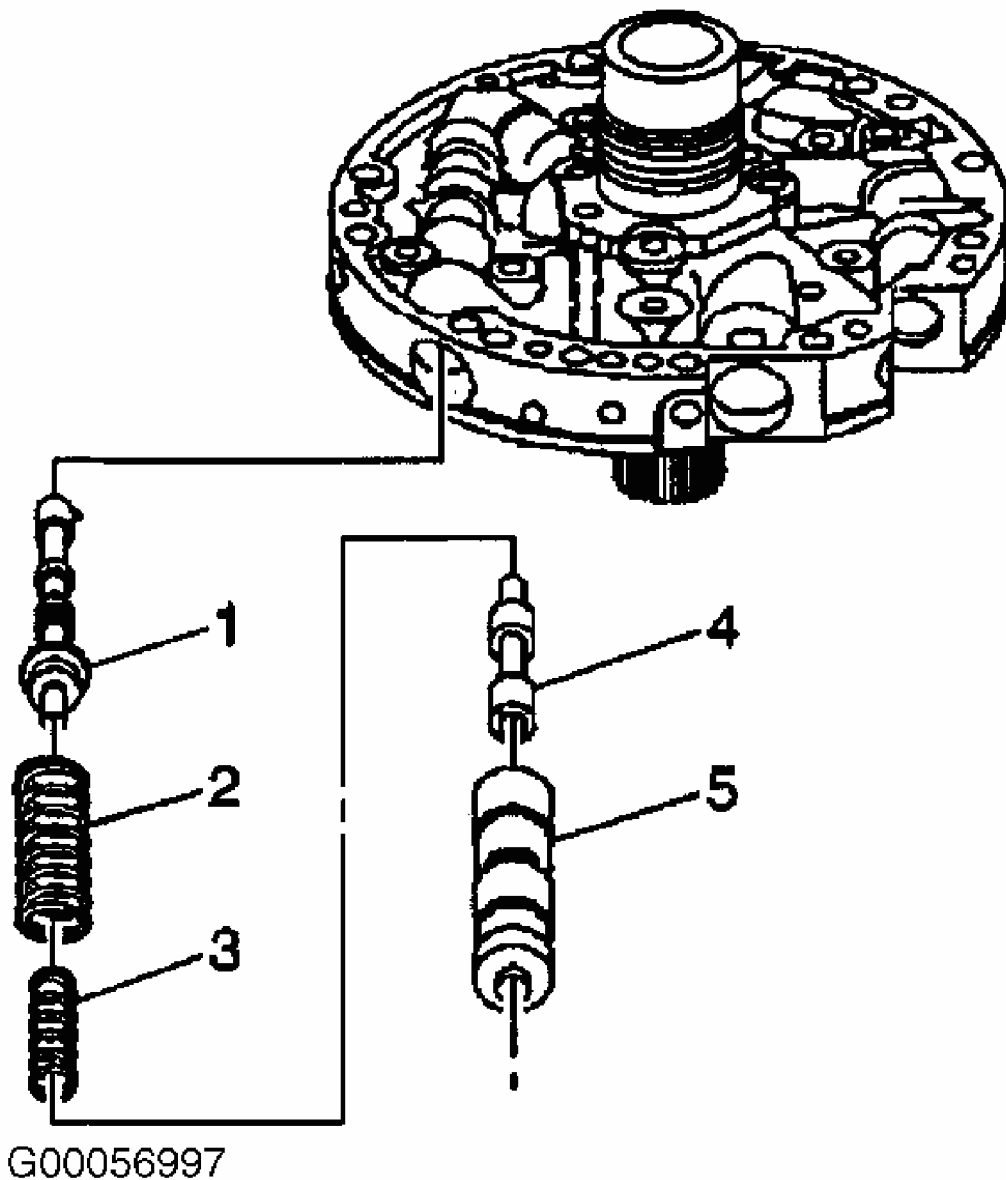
Identifying Reverse Boost & Pressure Regulator Valve Components
